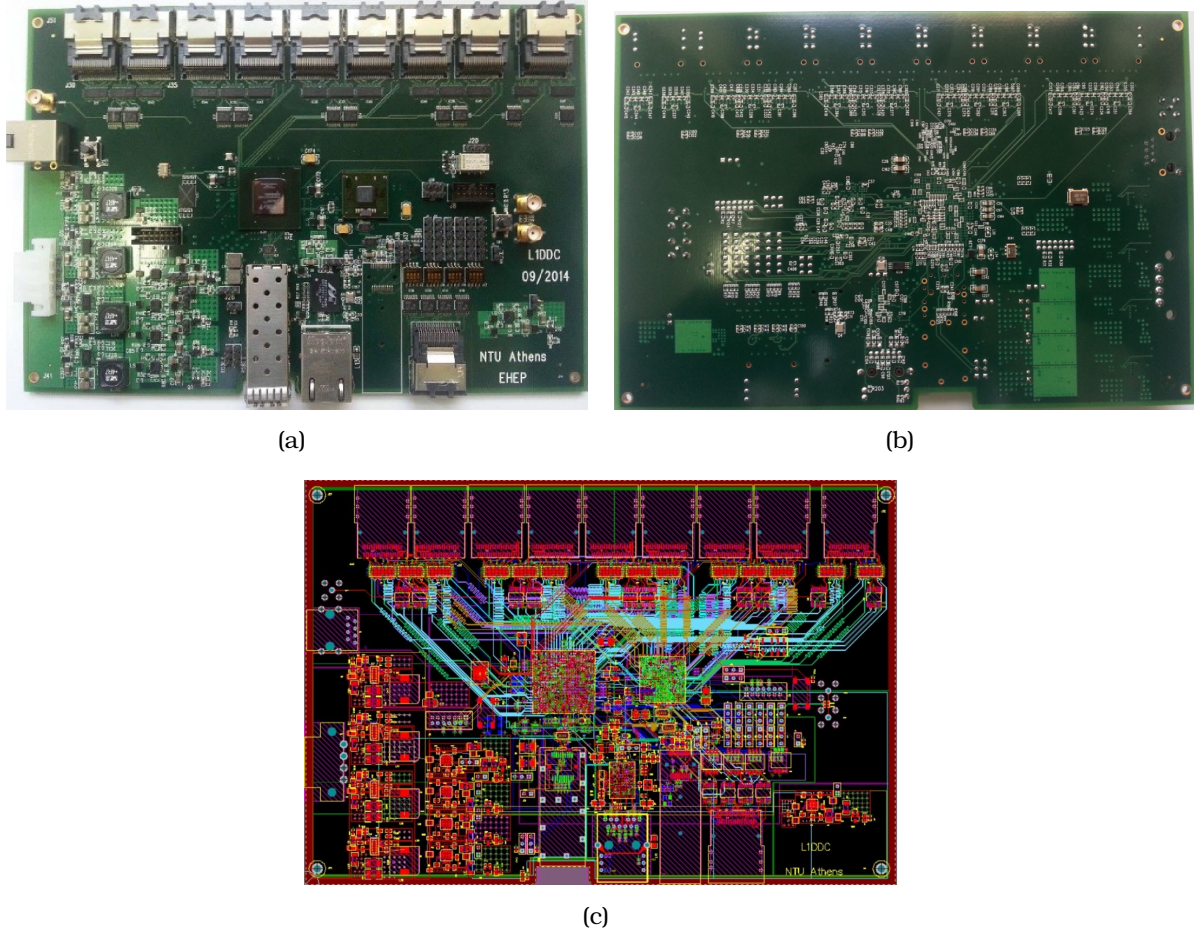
(a) Top side, (b) Bottom side and (c) layout of L1DDC prototype-1.
